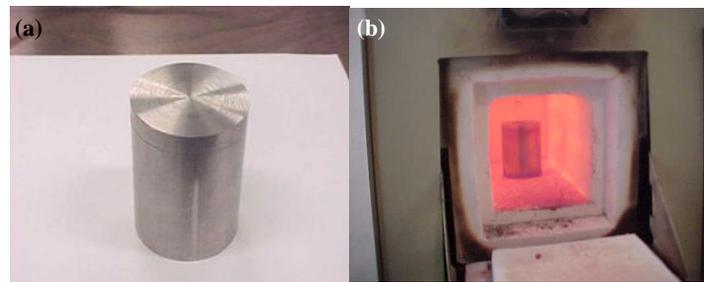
(a) Cylindrical stainless steel container for embedding the samples and (b) the whole set placed into a conventional furnace.
